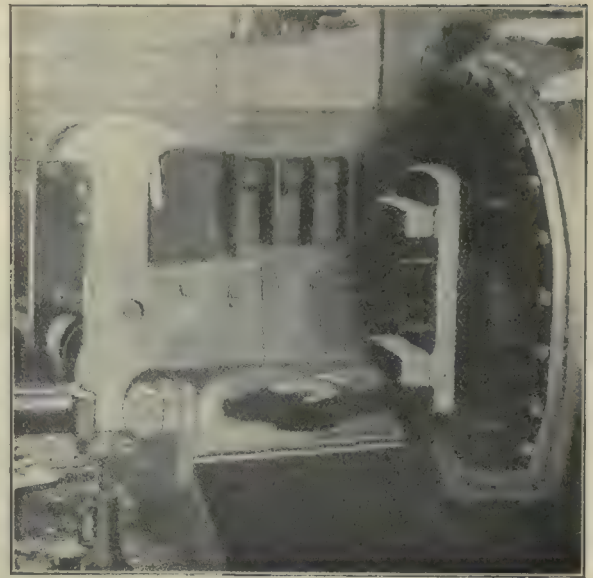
A WELDED LOCOMOTIVE FRAME
